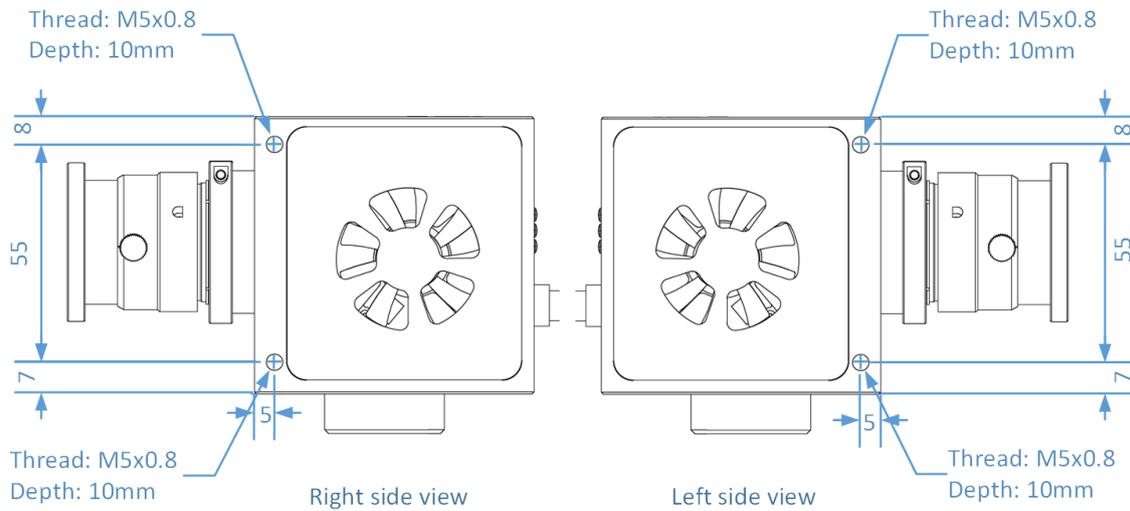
Side views of the snapscan camera along with dimensions and the available mounting holes (all dimensions are in millimeter)
